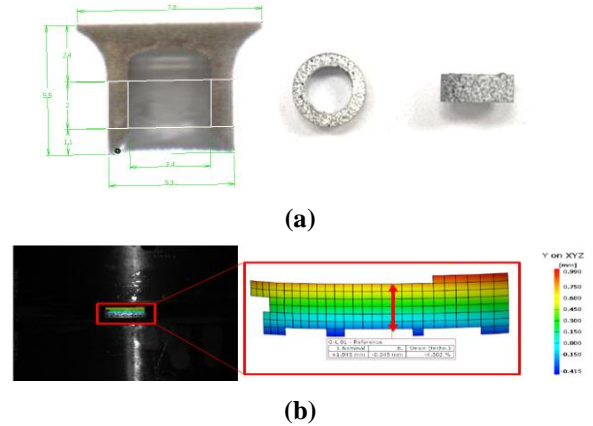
Rivet ring compression test with DIC system: (a) Machined rivet specimen; and (b) Ring compression test (Kim et. al [10])
